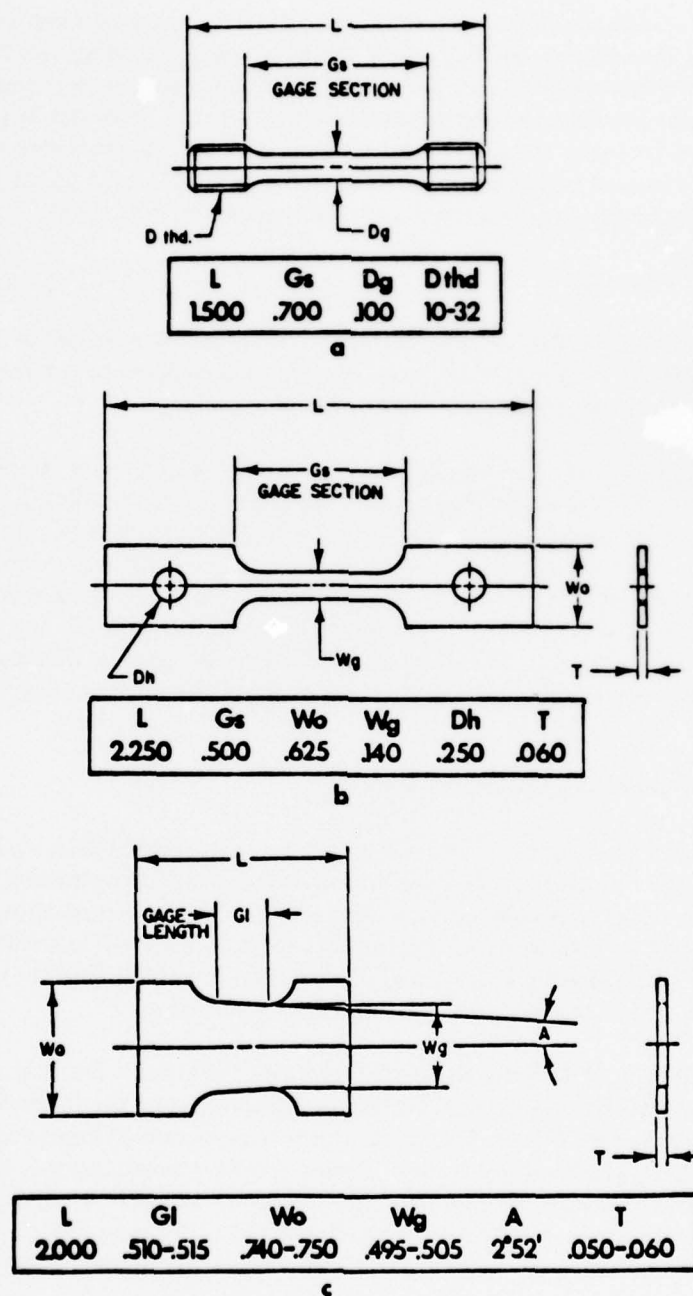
Dimensions in Inches of a) a Cylindrical Tensile/Stress-Rupture Specimen, b) a Sheet Type Tensile/Stress Rupture Specimen, and c) a Mini-Krause HCF Specimen Used in the Testing of Rheocast Material
